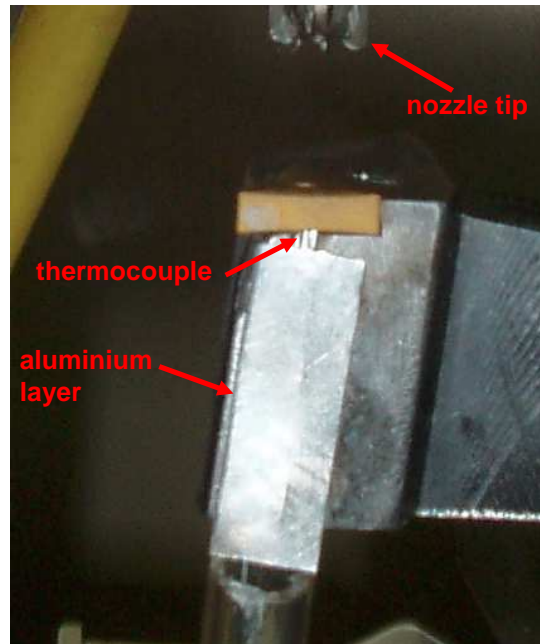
An aluminium layer was glued on the tool holder in order to protect the thermocouple wire from accidental contact with the workpiece during machining
